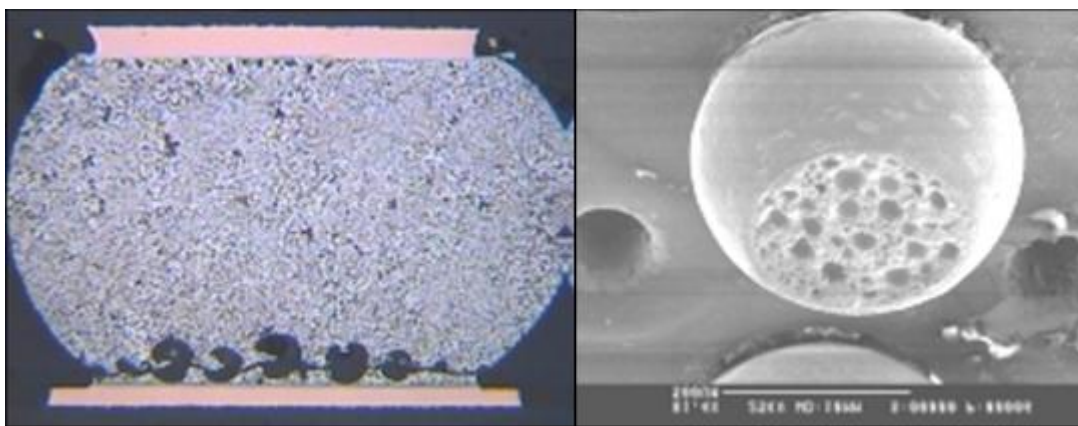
Solder joint Fractures due to Voiding¹⁰
